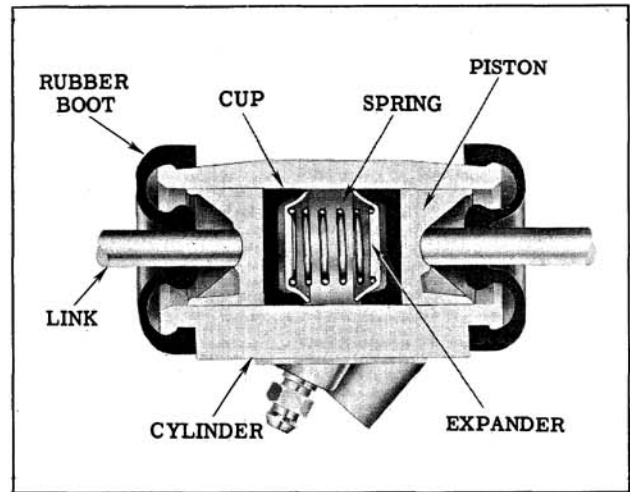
Wheel Cylinder (54 through 86 Series)
